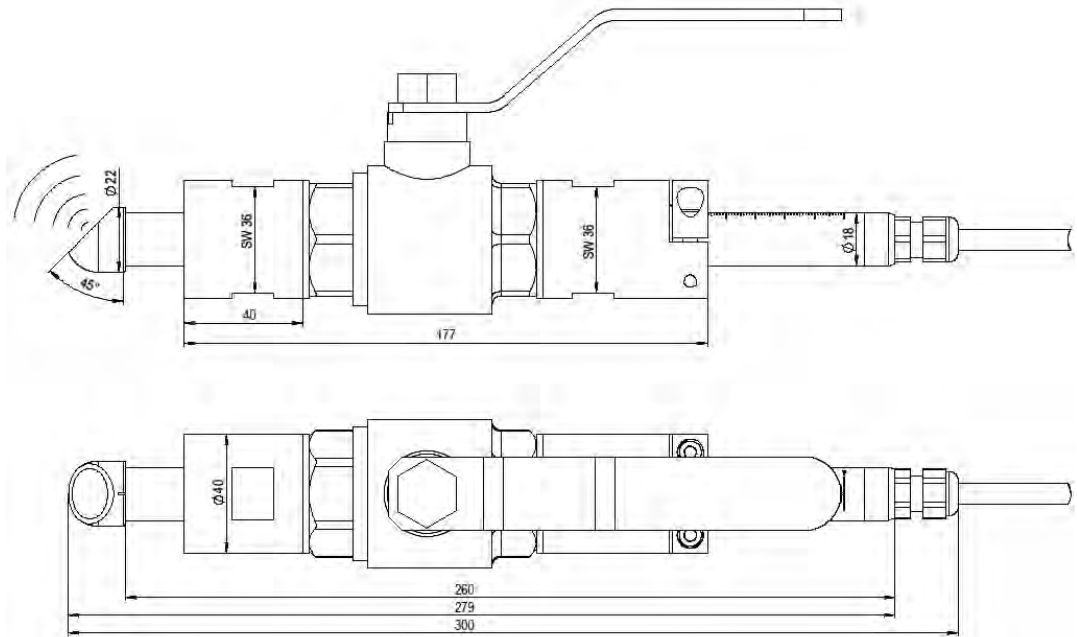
Dimensioned drawing pipe sensor Type NIS0V200RL
